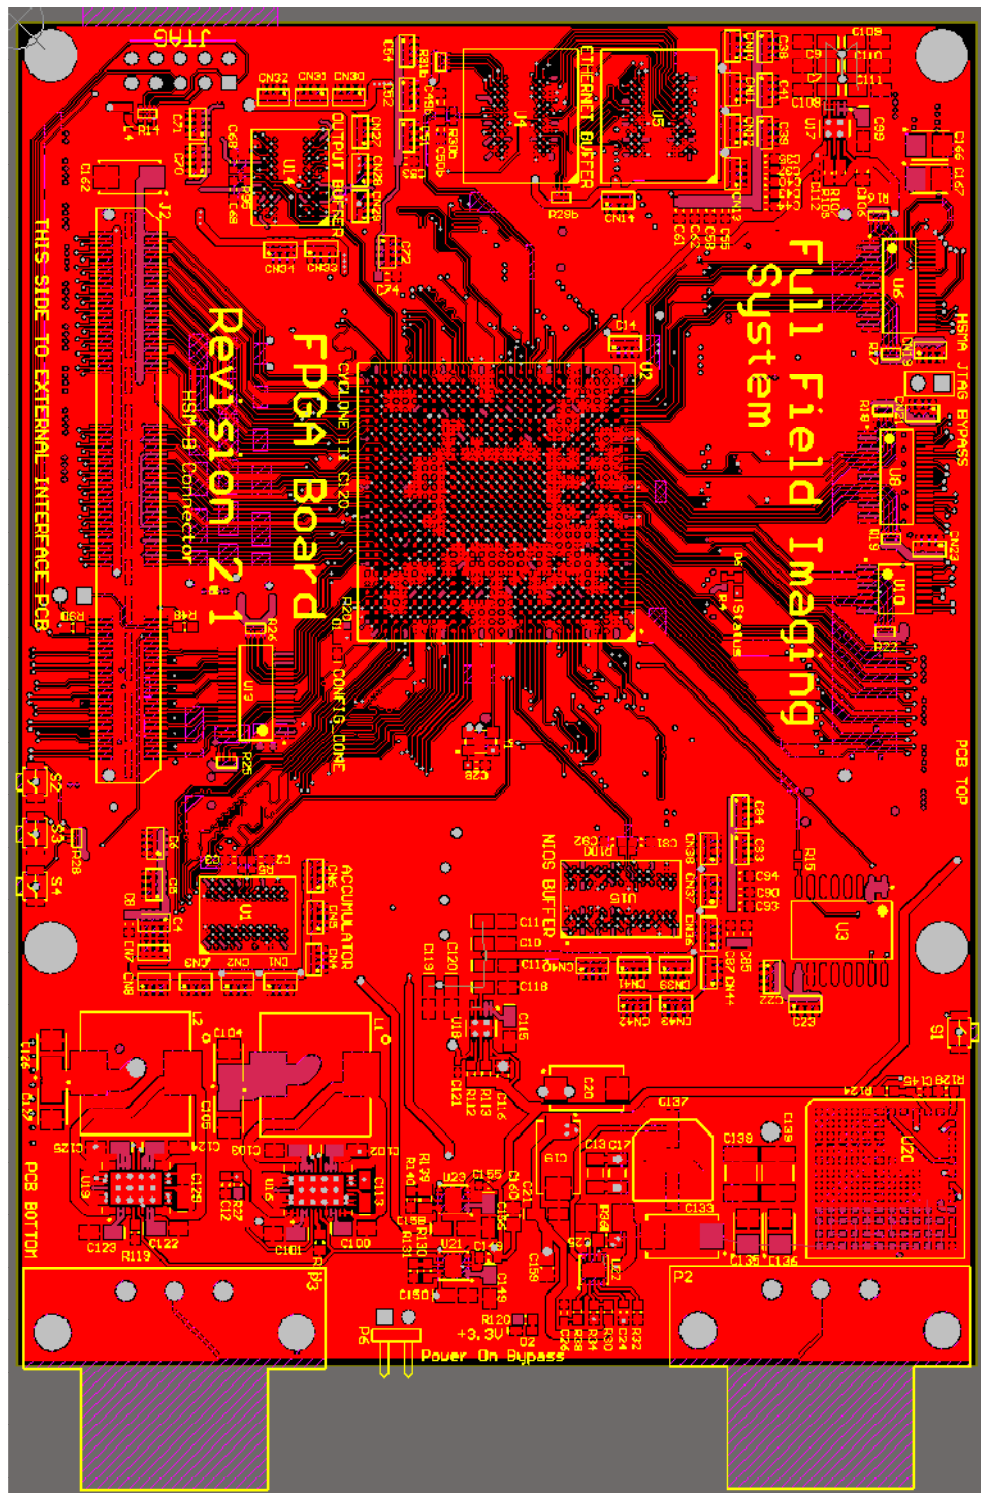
FPGA Board Rev 2.1 Top Layer
